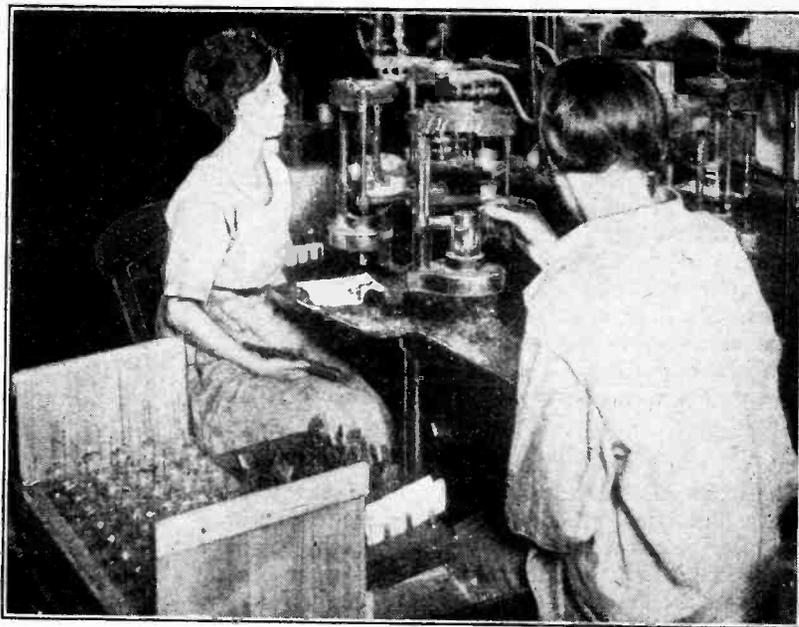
A machine at the Mullard Works for sealing the bulb to the foot of the valve.
